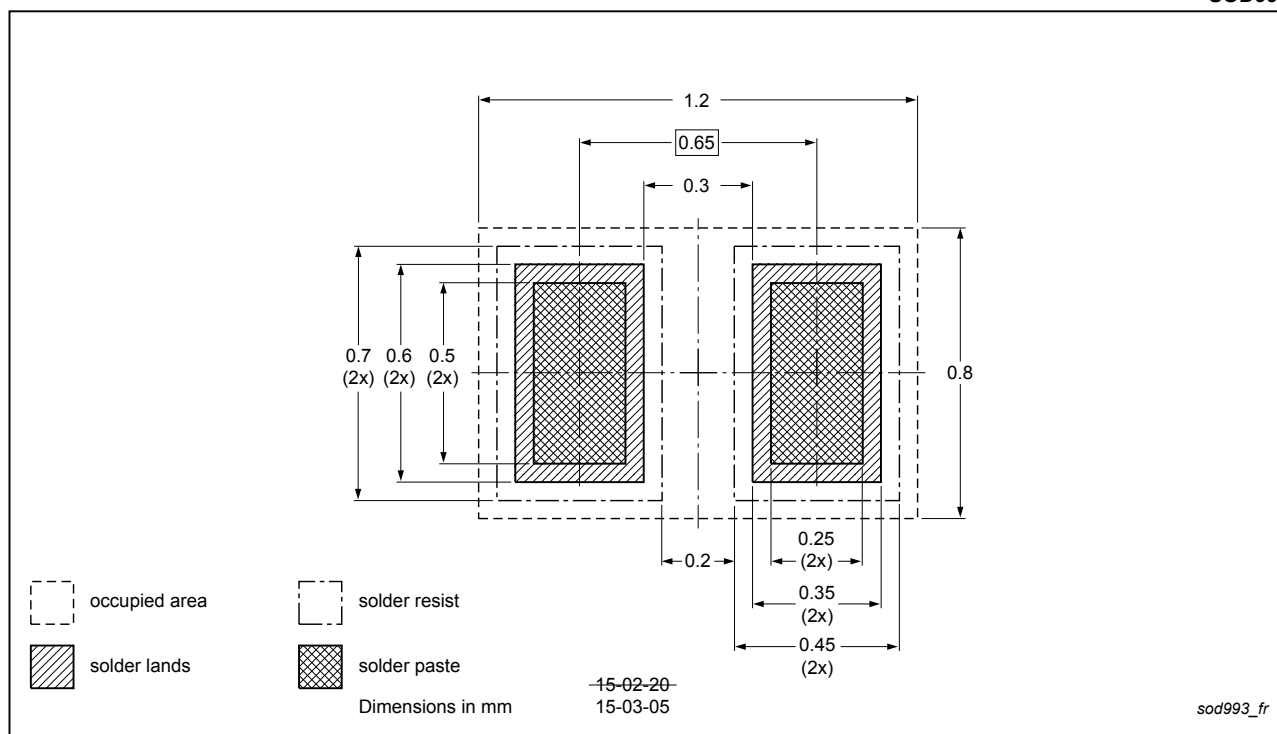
Reflow soldering footprint for DSN1006-2 (SOD993)
